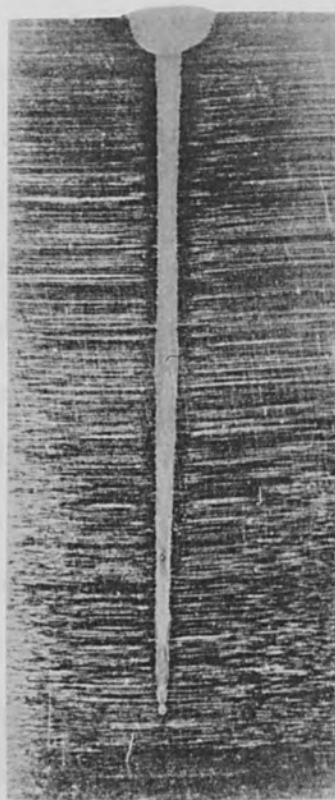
Electron beam deep penetration weld in stainless steel. Depth of penetration 32 mm, welding speed 2 mm/sec, power 3 kW, pulsed beam.
